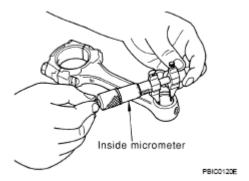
Measuring Inner Diameter Of Connecting Rod Bushing With Inside Micrometer
